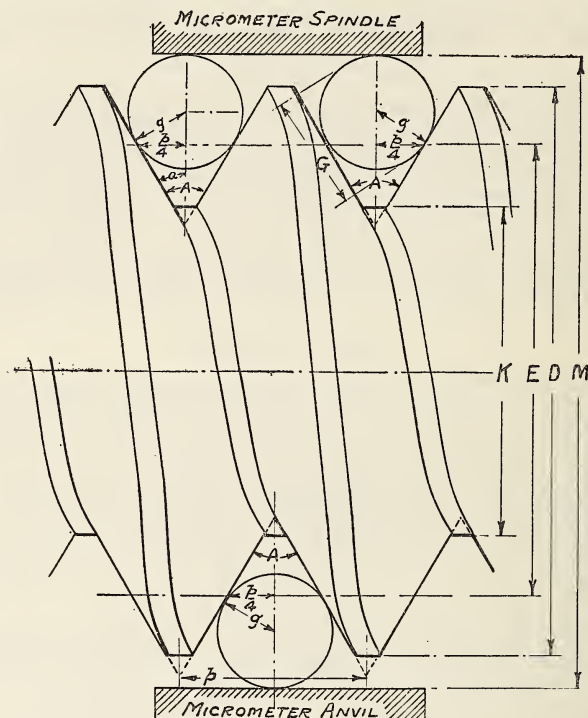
Three-wire method of measuring pitch diameter of thread plug gages.
